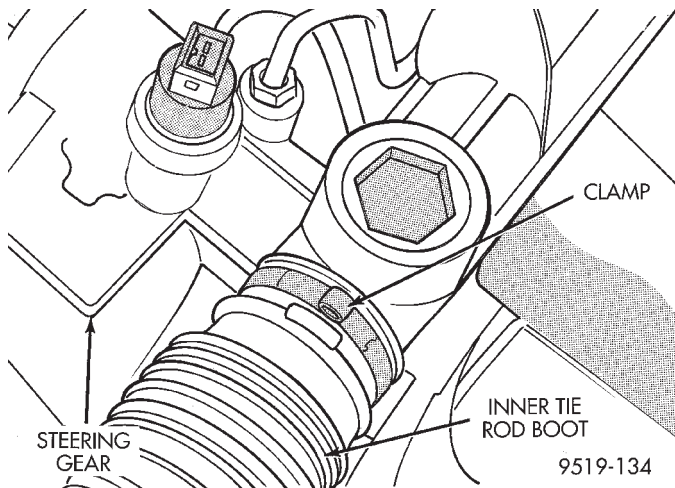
Tie Rod Boot To Steering Gear Clamp
